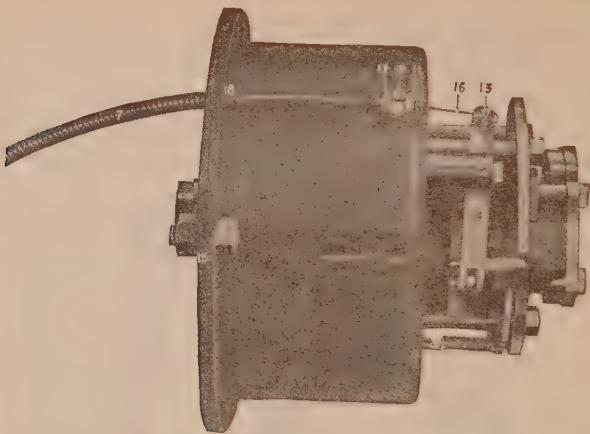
Assembly of Volkman mechanical starter. 10, post for releasing cable; 11, 12, lock nuts; 13, swivel on release lever; 14, release lever; 15, flange on spring case; 16, releasing cable; 17, spring holding clutch; 18, flange for brass sleeve.
